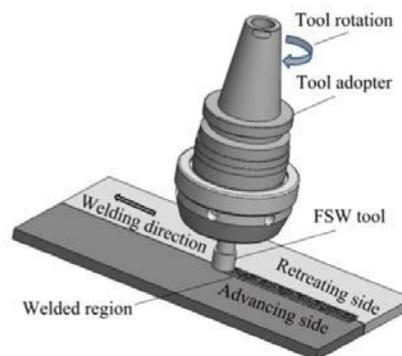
Schematic Diagram of Friction Stir Welding [5]
